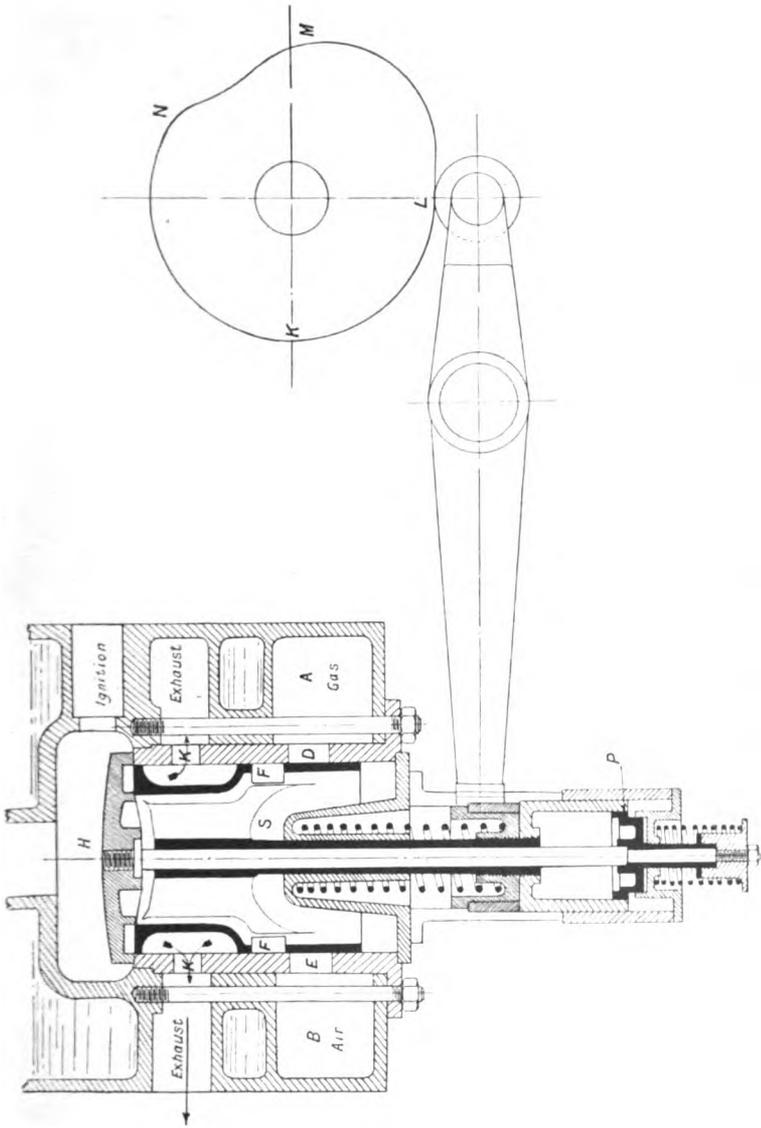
Section through Valve Chamber, Sargent Engine.
